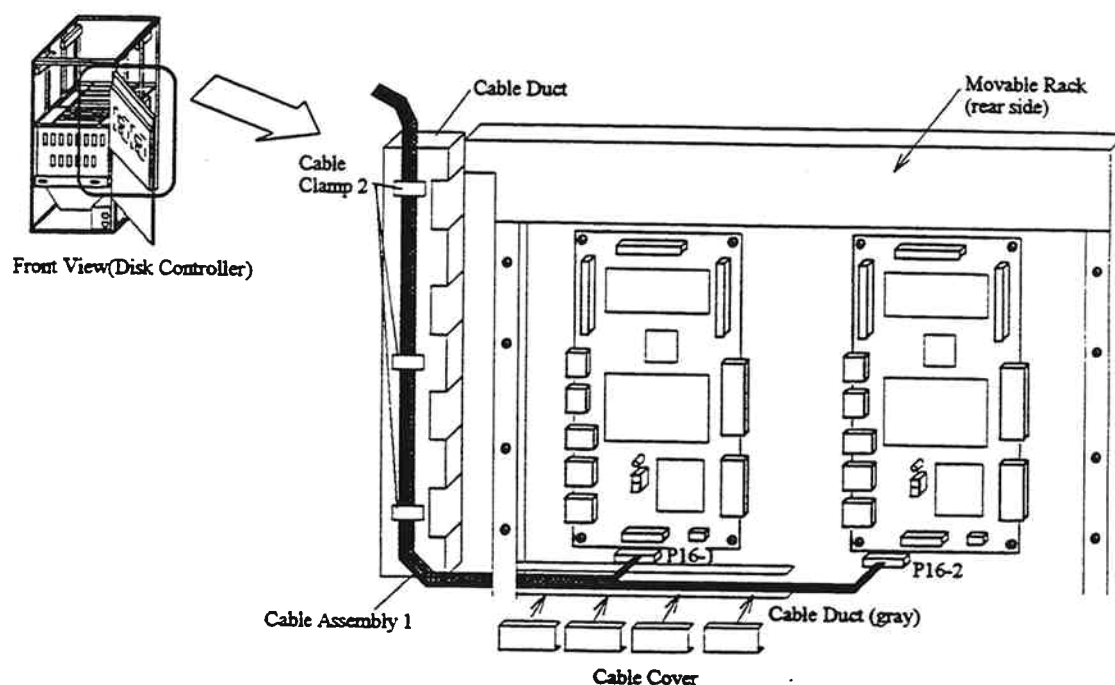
Removal of the Cable Assembly 1
